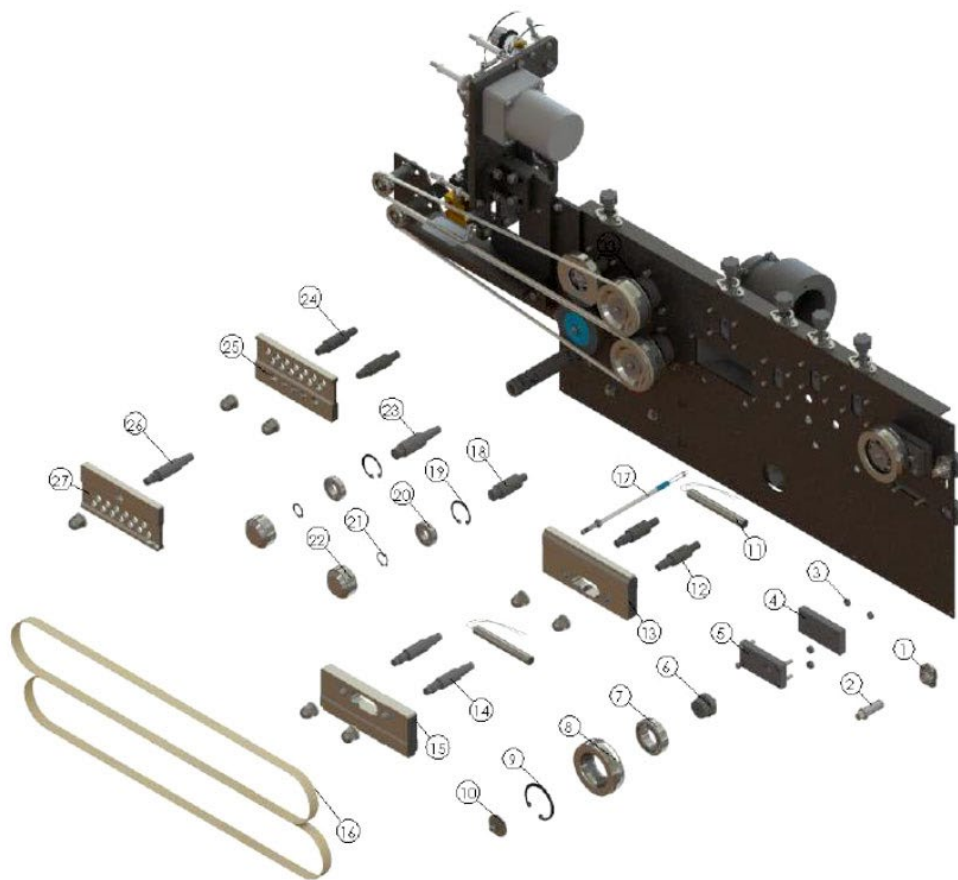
FRS-1120W Heating / Cooling Blocks Parts Diagram
